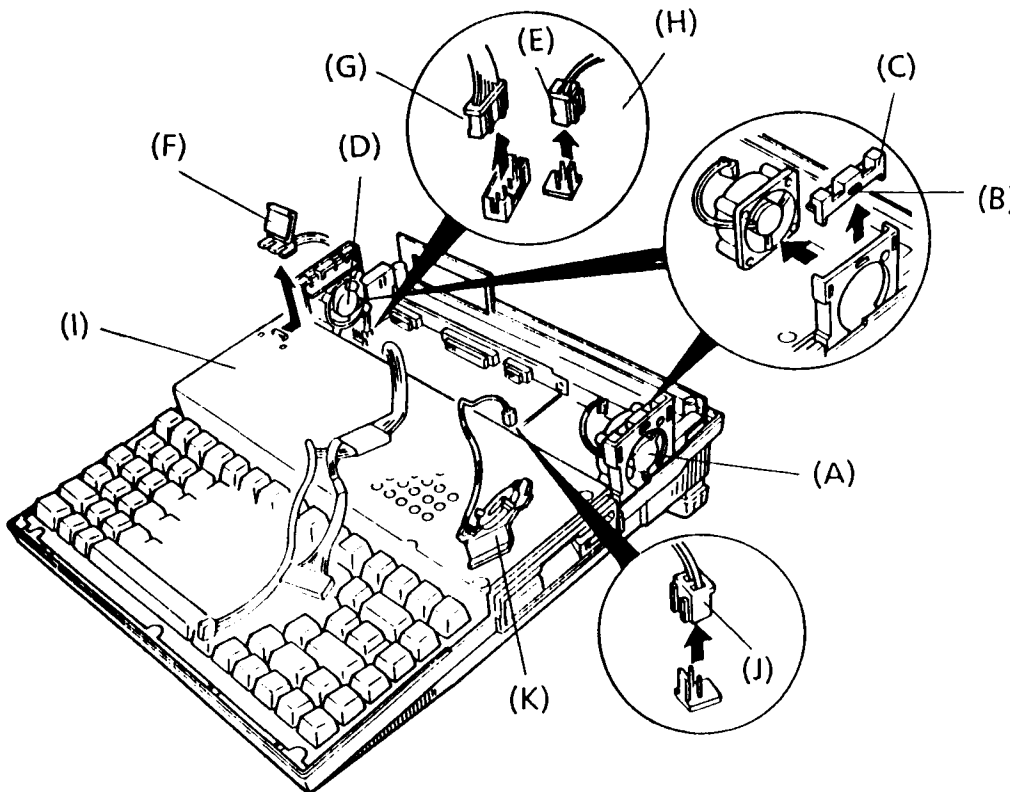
Removing the Fan, the LED Board and the Speaker
